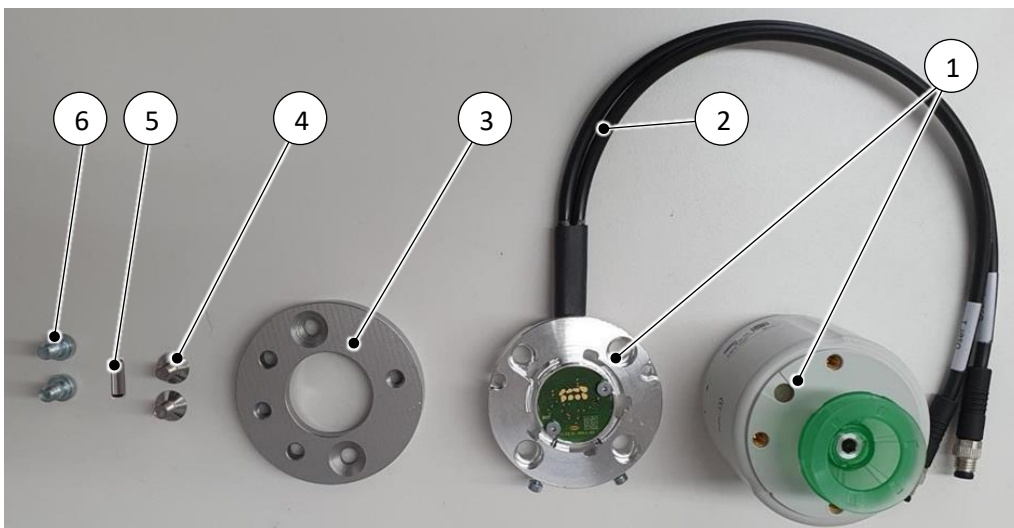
Assembly set Schmalz Cobot Pump Mini ECBPM
